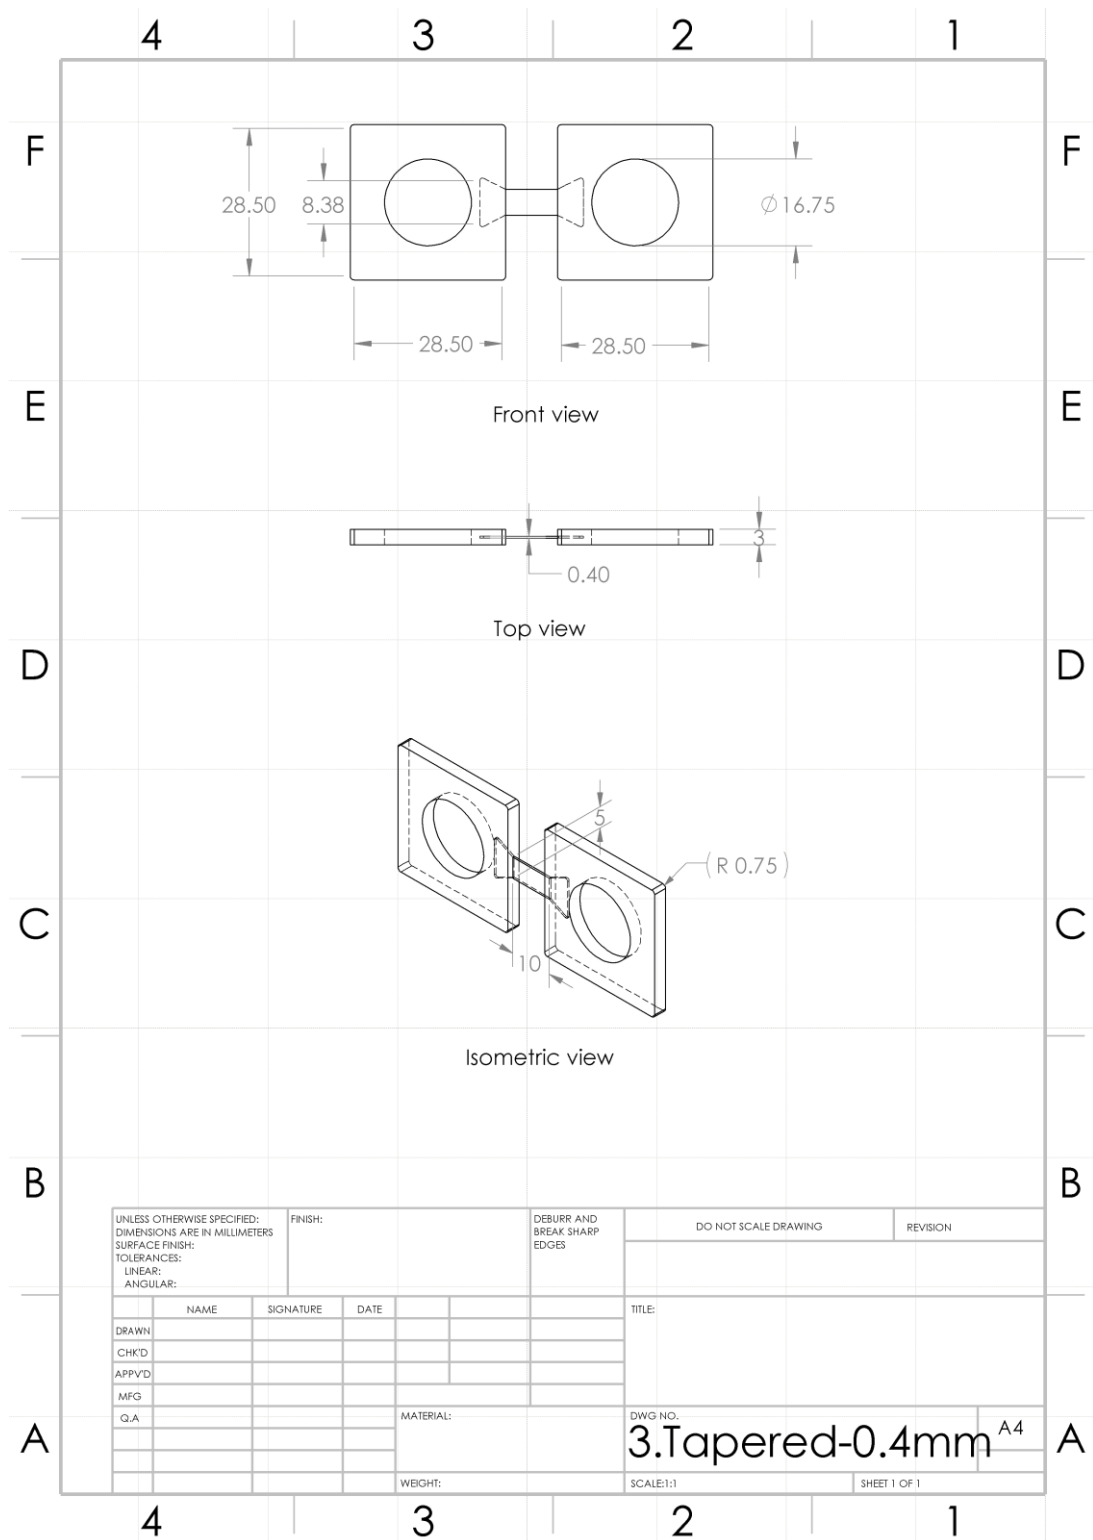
The technical drawing of the bi-material compliant mechanism with tapered-shaped interface in 0.4 mm thickness
